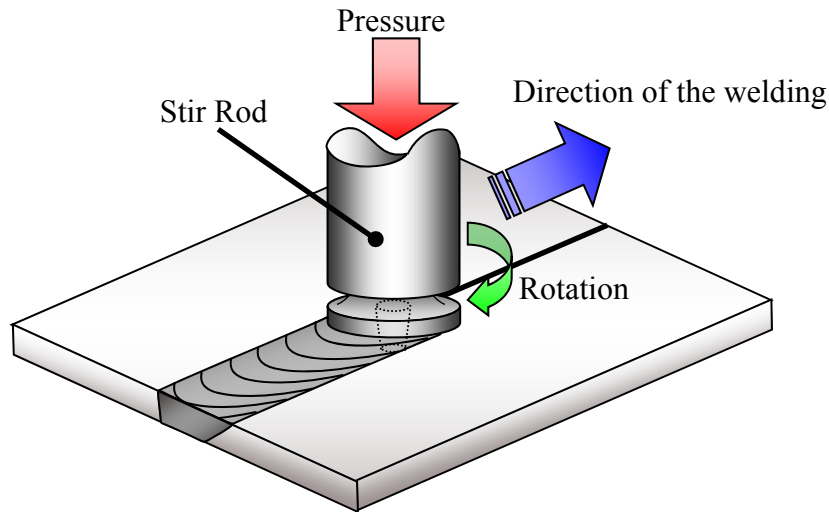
Schematic scheme of Friction Stir Welding
